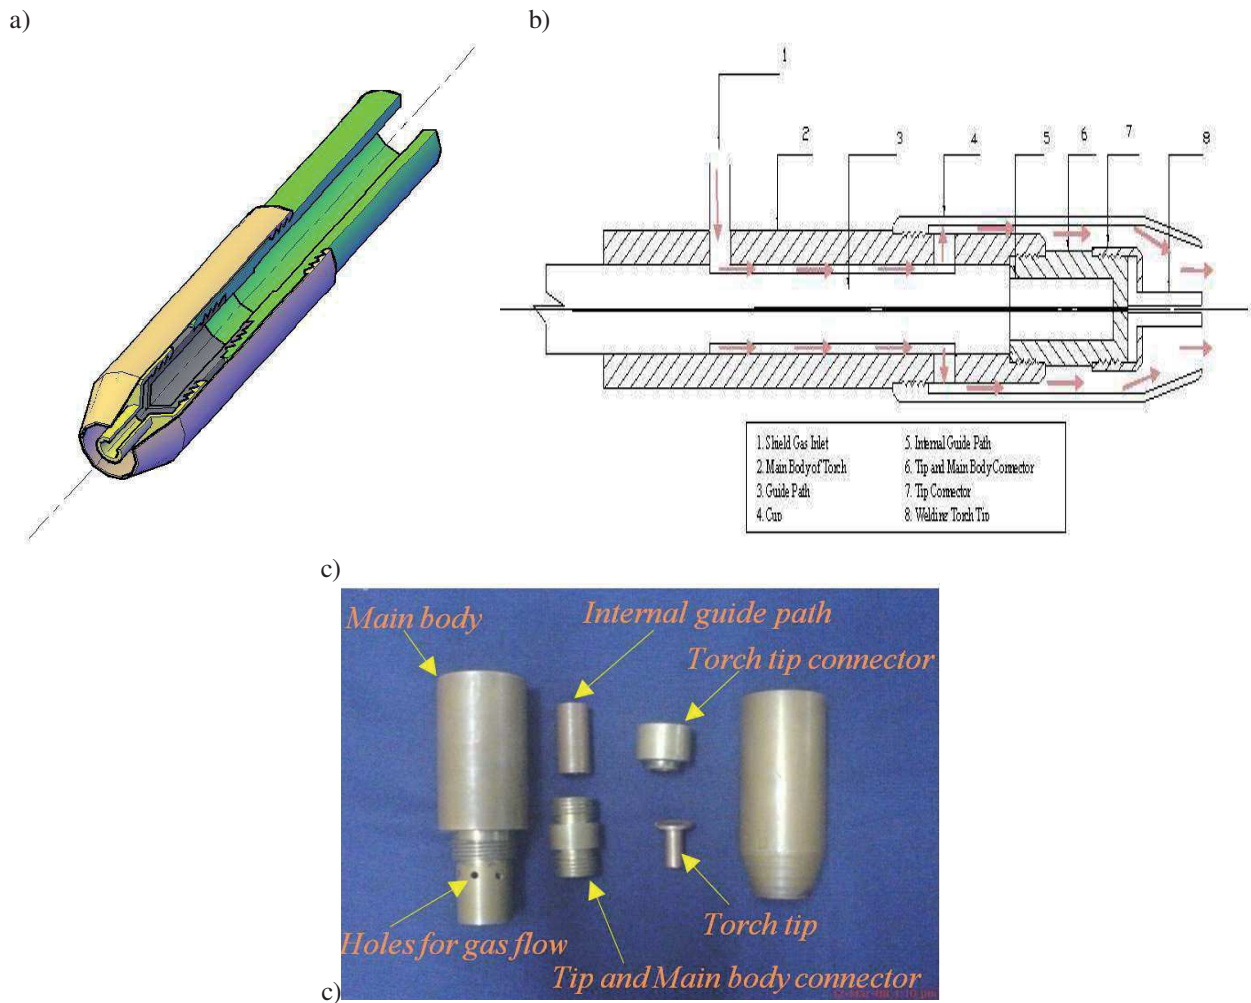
Newly developed welding torch for strip wire electrode welding a) CAD model torch for strip wire welding torch, b) gas flow path for strip wire welding torch, c) fabricated strip wire electrode torch and their parts
